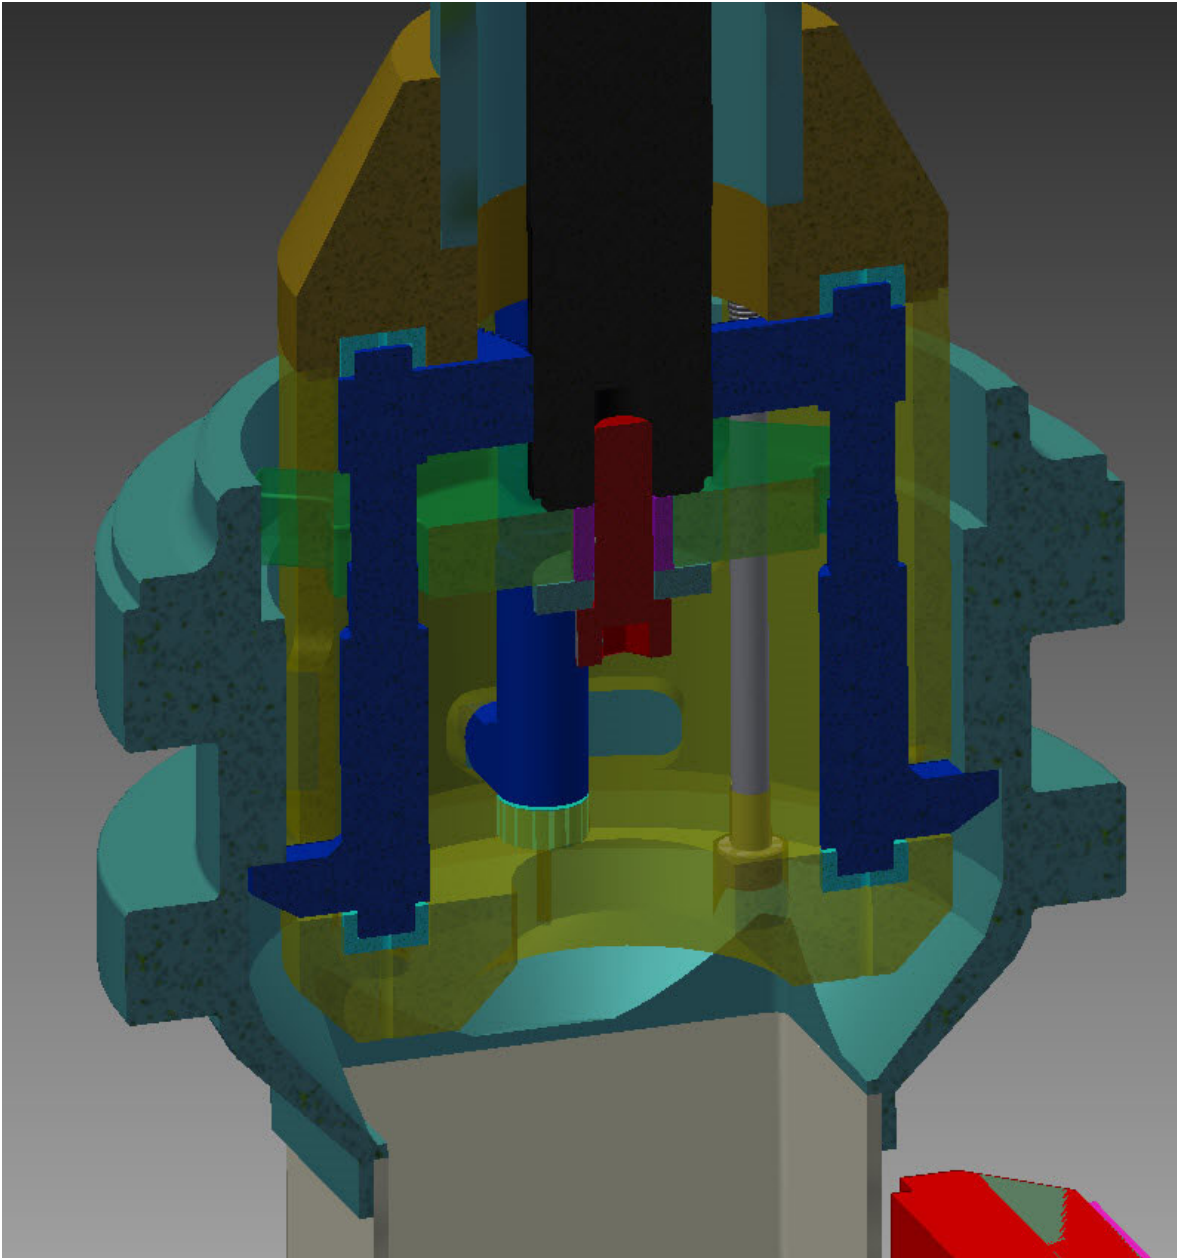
Section through the target dipstick and the flange of the Target assembly showing interaction of dog jaws and presence indicator.
